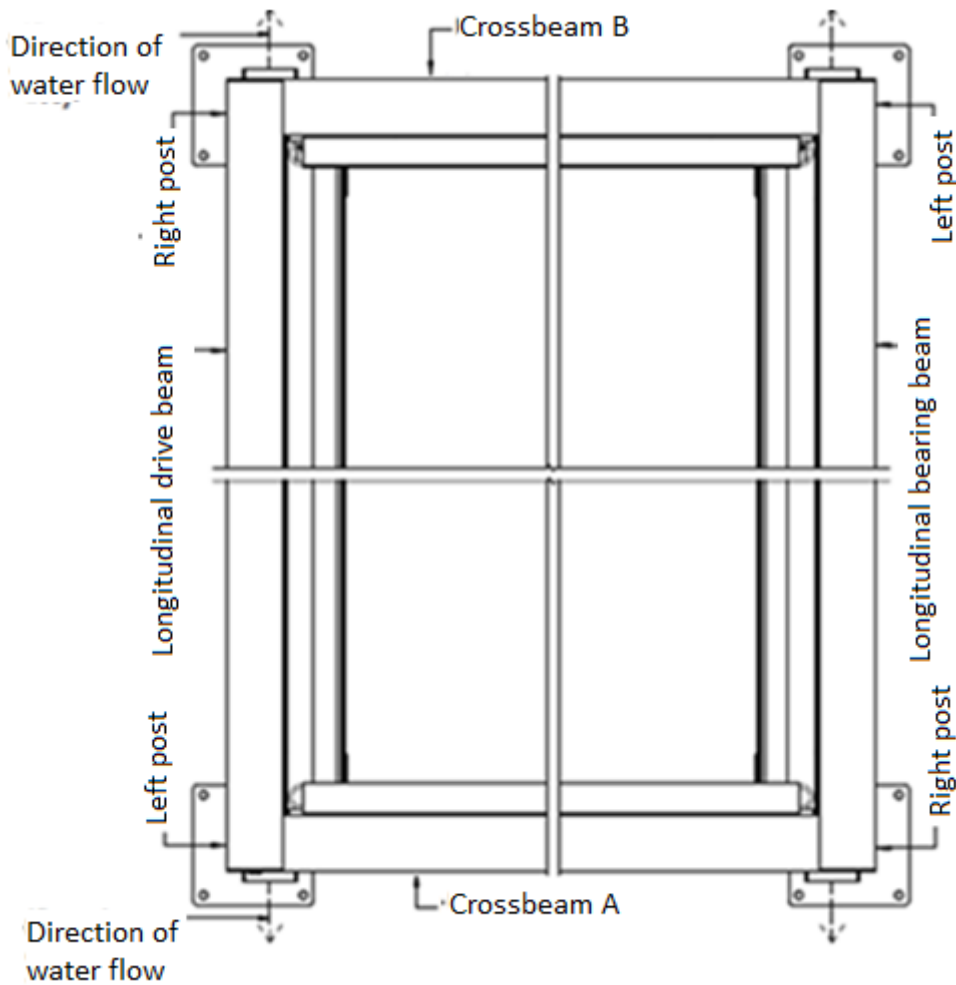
Type IV - feet projecting outwards and drainage to front/back.
